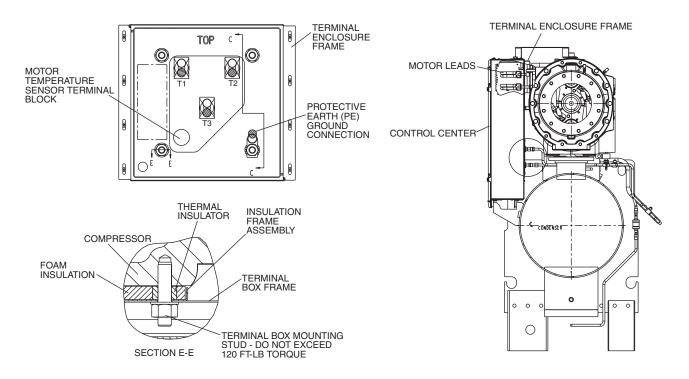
Motor Terminal Box (Q and R Compressors)
